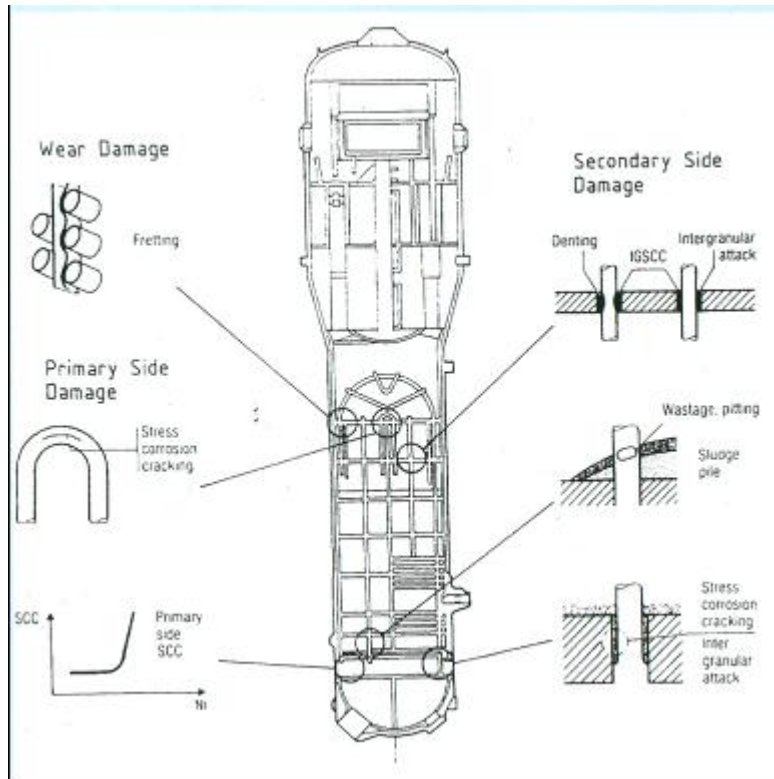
Main types of damage occurring in the steam generator [6.2.3]
